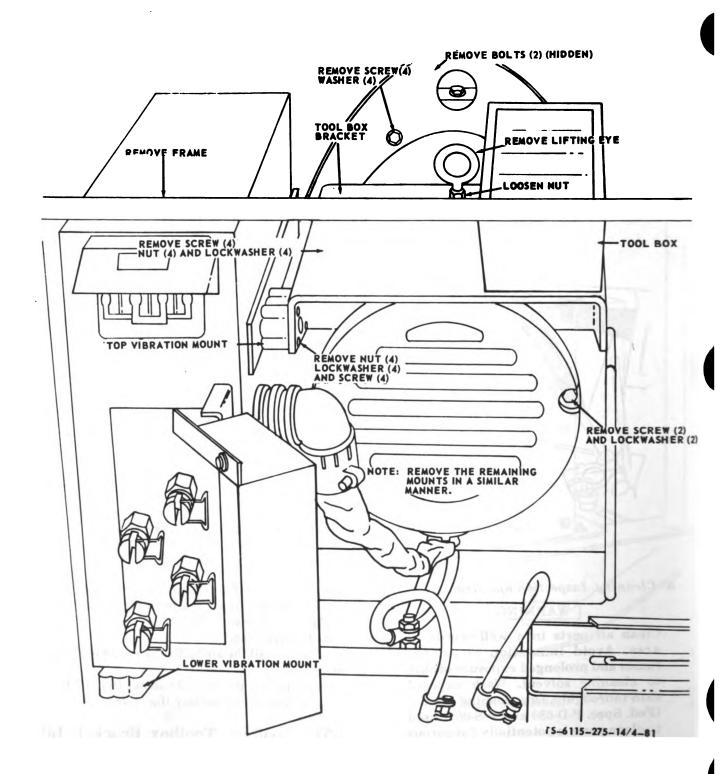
Toolbox, toolbox bracket, lifting eye bracket, guard frame, and top vibration mounts, removal and installation (Model MEP-023A).
